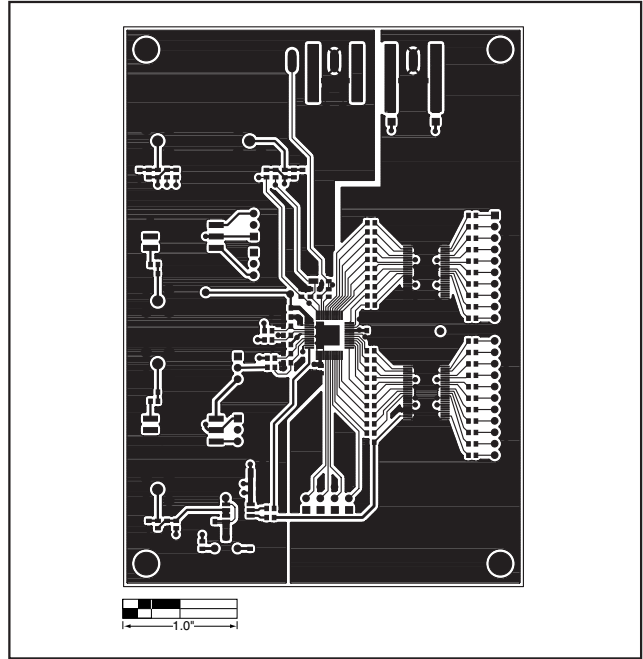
MAX1181 EV Kit PC Board Layout—Component Side
